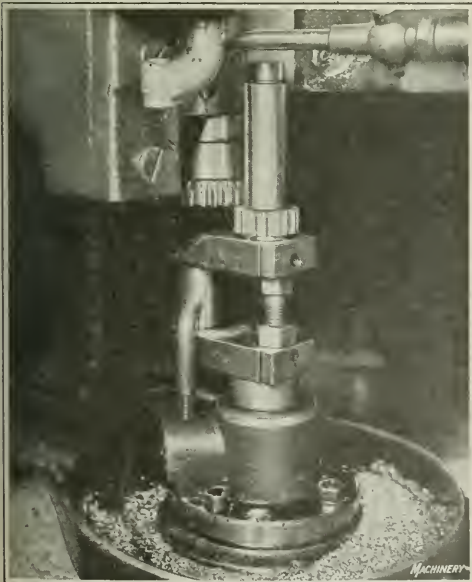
Cutting Gear Teeth Close to Crankshaft Web, using Push Stroke
